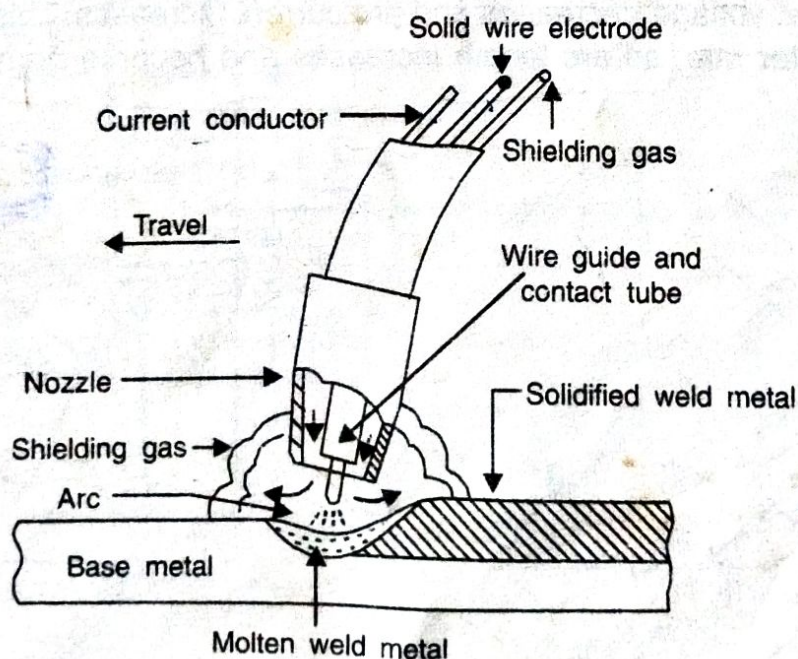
(a). Principle of Metal Inert Gas Welding (MIG).
